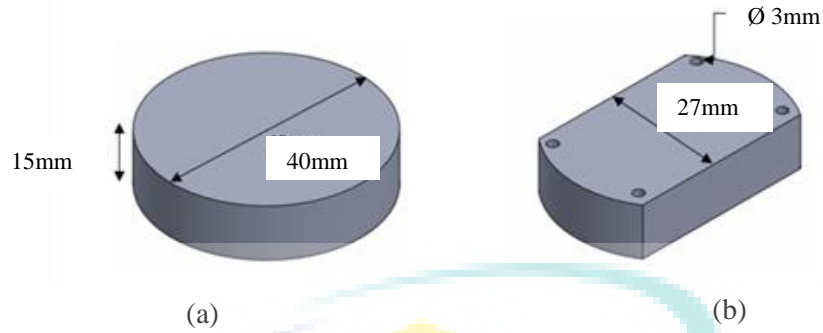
Sample size for (a) laser surface processing and (b) sliding wear test.
